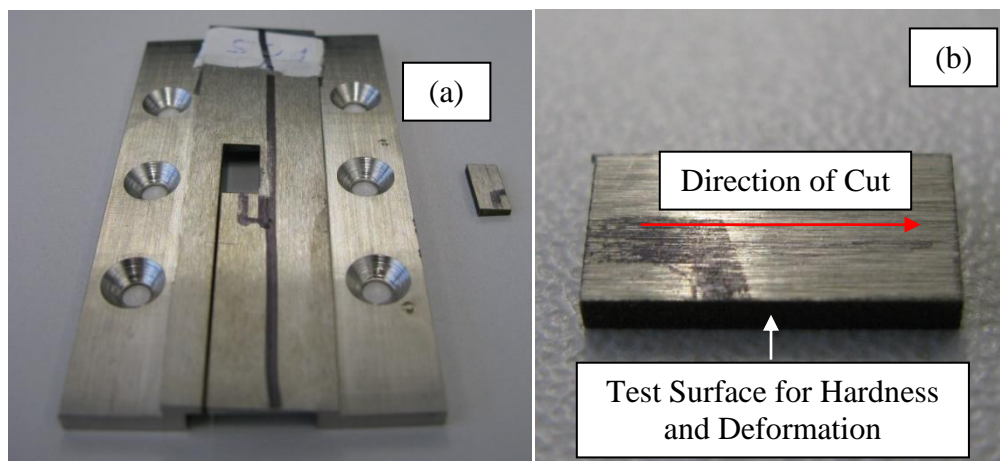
Cut-up sample for Surface Integrity testing; (a) Cut out section from main test piece material, (b) Close up view of cut out section showing testing surface.
